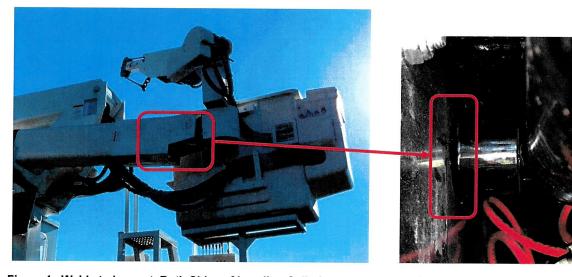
Welds to Inspect, Both Sides of Leveling Cylinder
